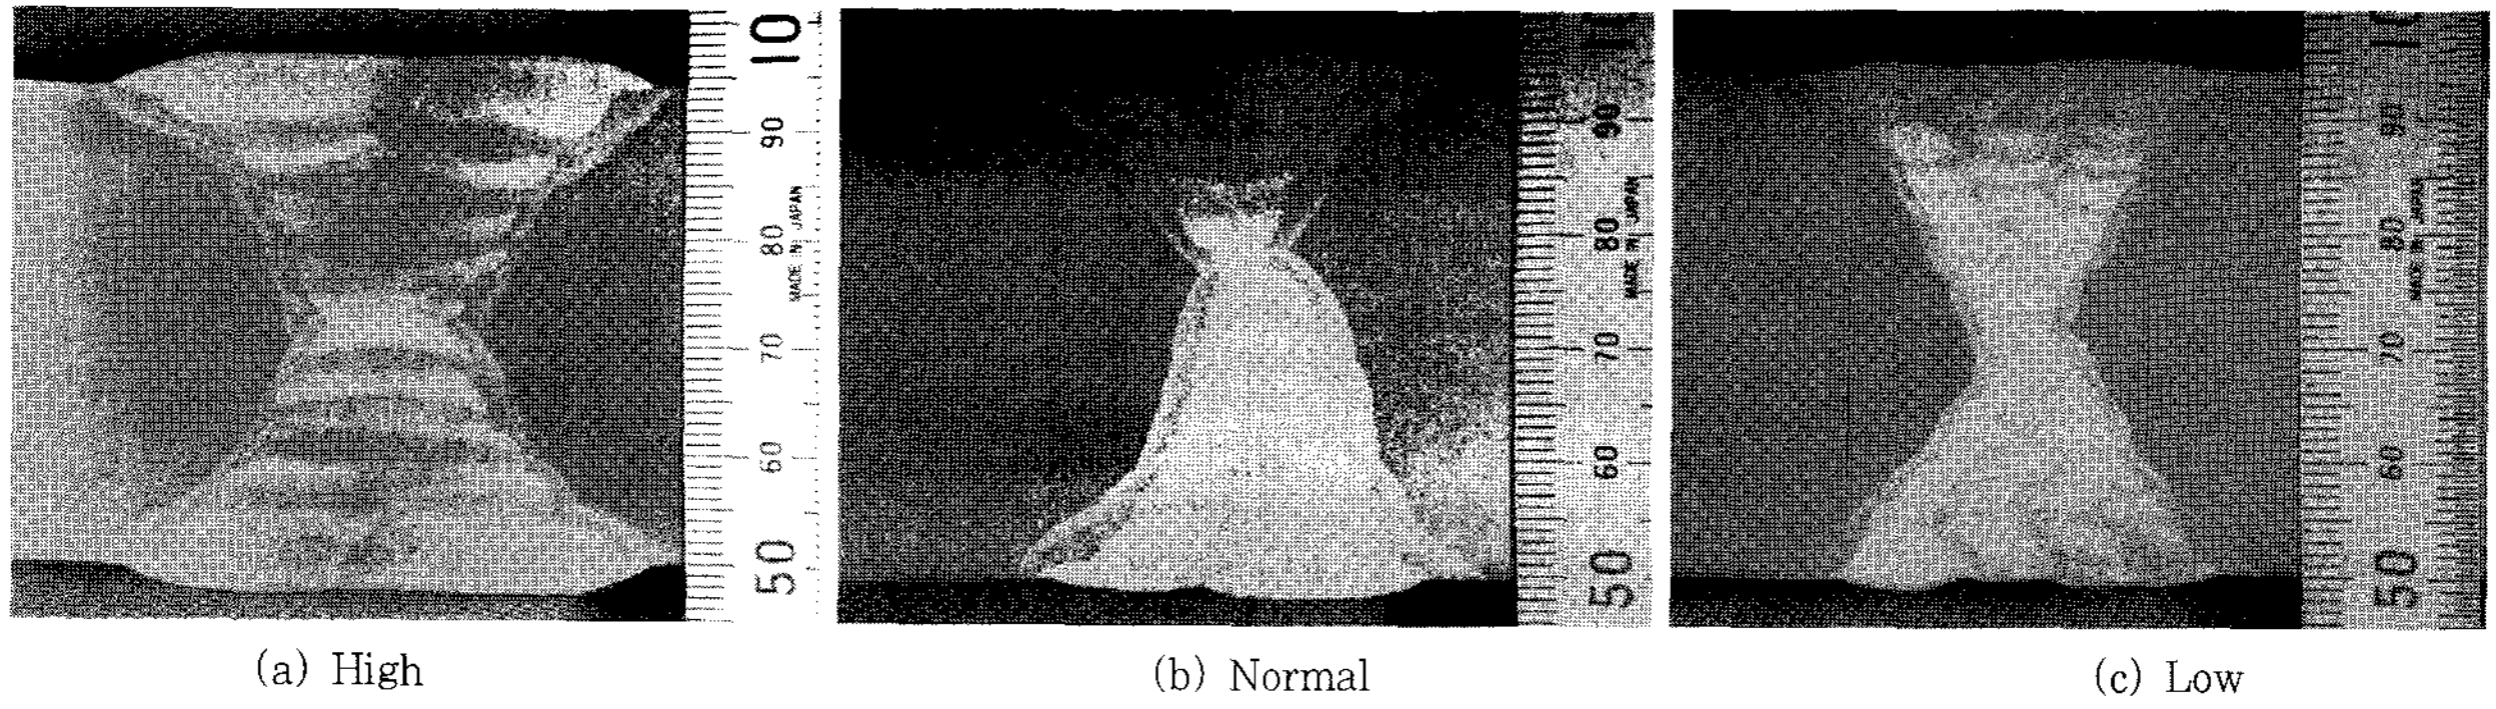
Macrosection of weldments depending on weld heat input
